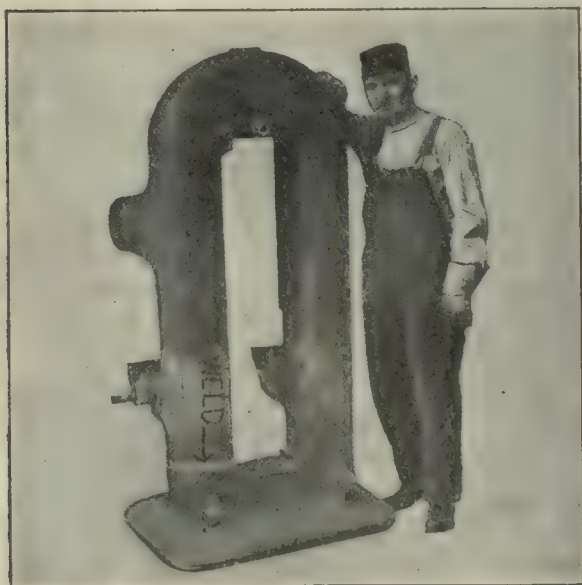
ANOTHER WELDED PRESS FRAME
